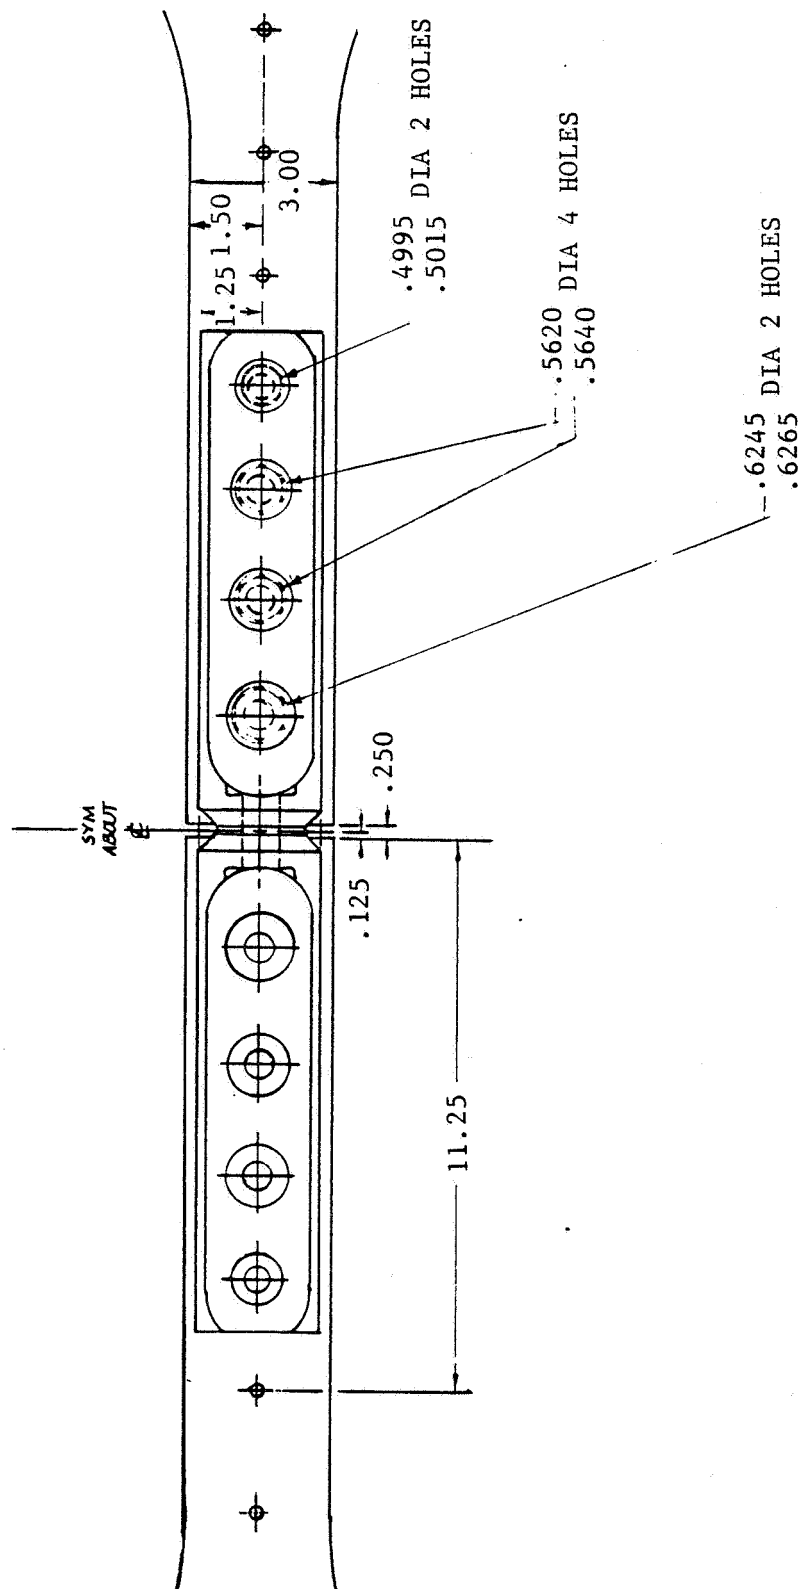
SUBCOMPONENT #2 - PLAN VIEW
